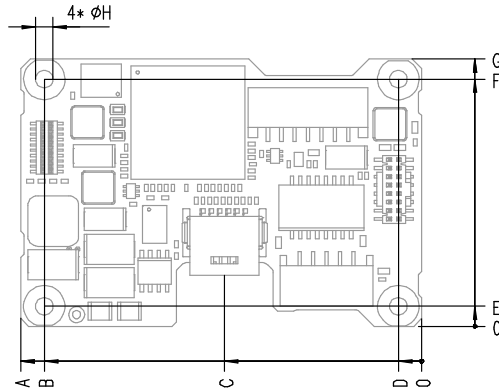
ETK-S4.2C Dimensions - Top View
